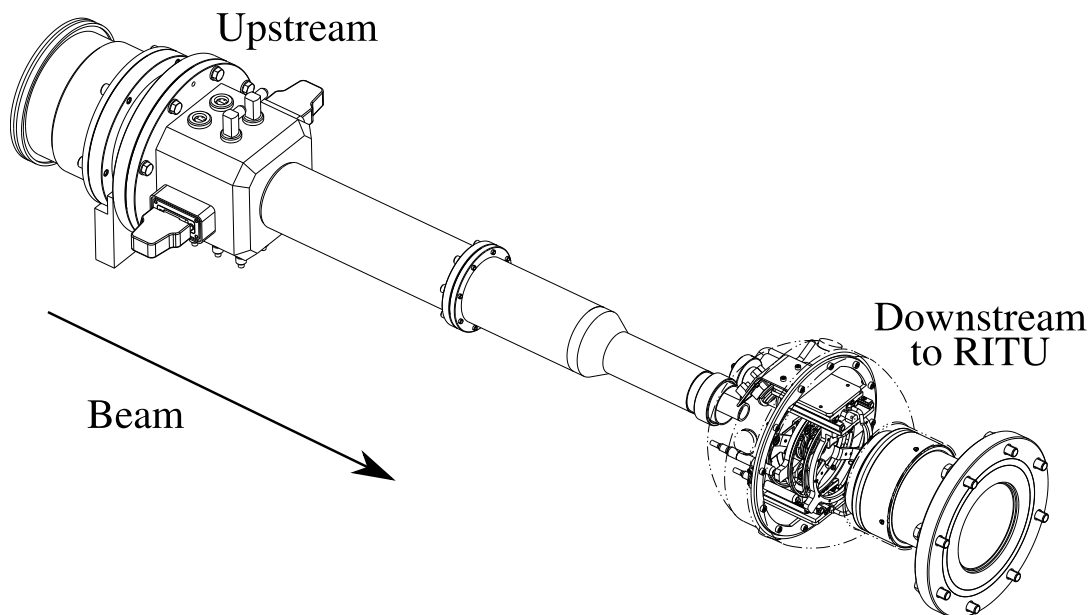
CAD drawing of the TPEN vacuum housing for RITU [85]
